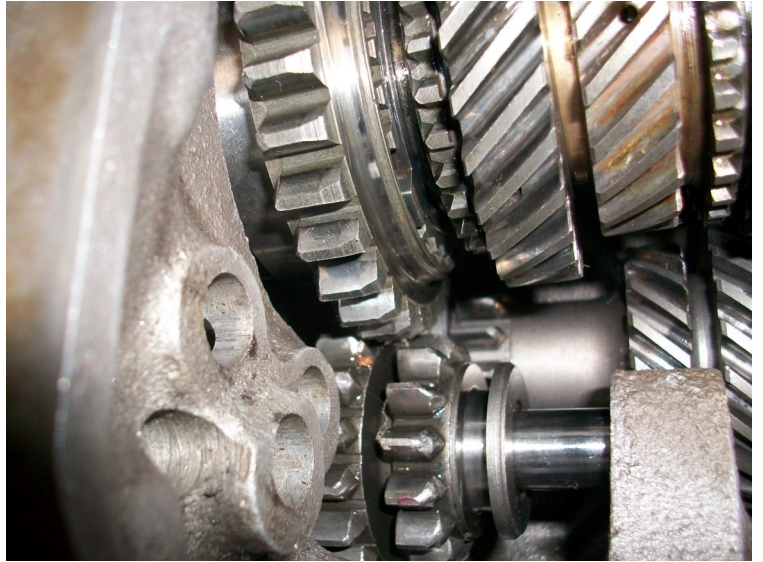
3rd motion shaft being fitted, note it being tilted to clear reverse gear
